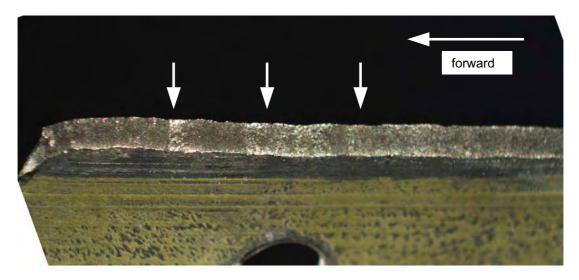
, Photograph showing the incremental crack growth indications (arrows) on the fracture segment near Hole 7, which is between the two main fatigue cracking systems at Holes 4 and 5 and Holes 10 through 25.
